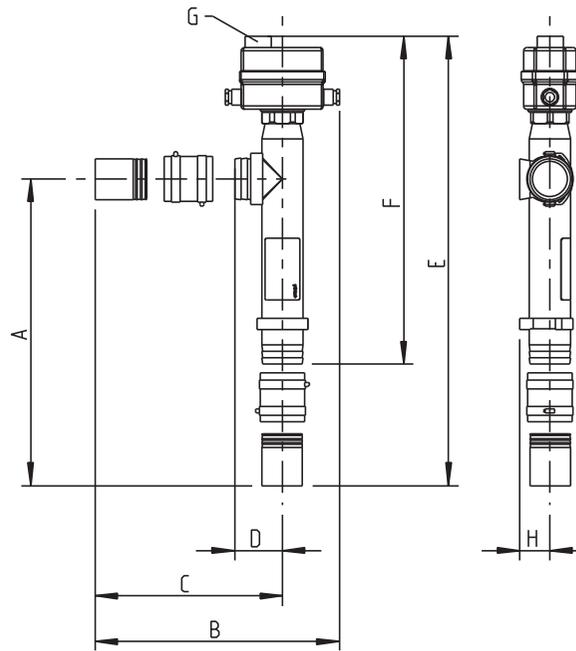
Installation and dimensional drawing EWT-L blower air preheater
